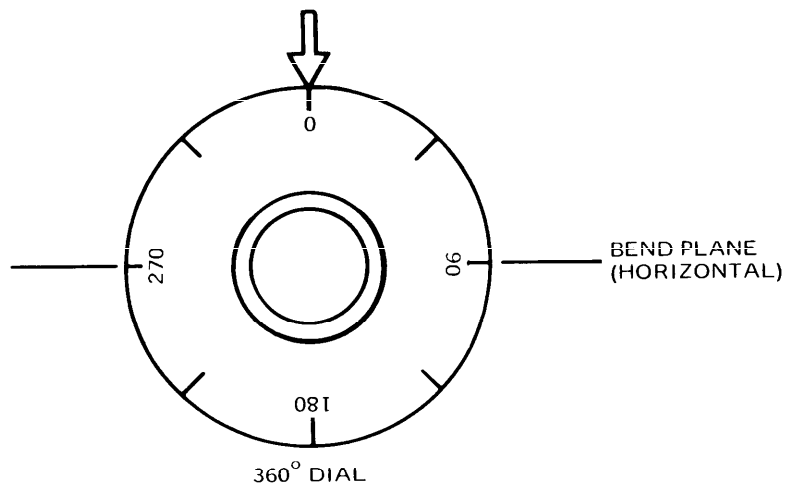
TYPES OF DIALS COMMONLY USED WITH TUBE BENDING MACHINES.
